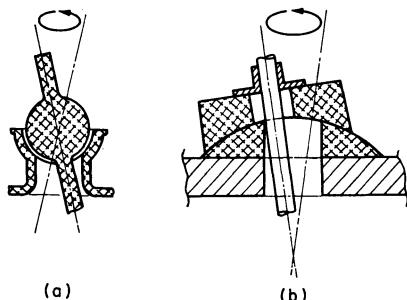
Spherical ground seals used to transmit wobbling motion: (a) spherical joint (after Skidmore¹¹⁴⁵); (b) joint constructed from lenses. After Lloyd⁷⁷⁶ (*Courtesy of the American Institute of Physics*)
